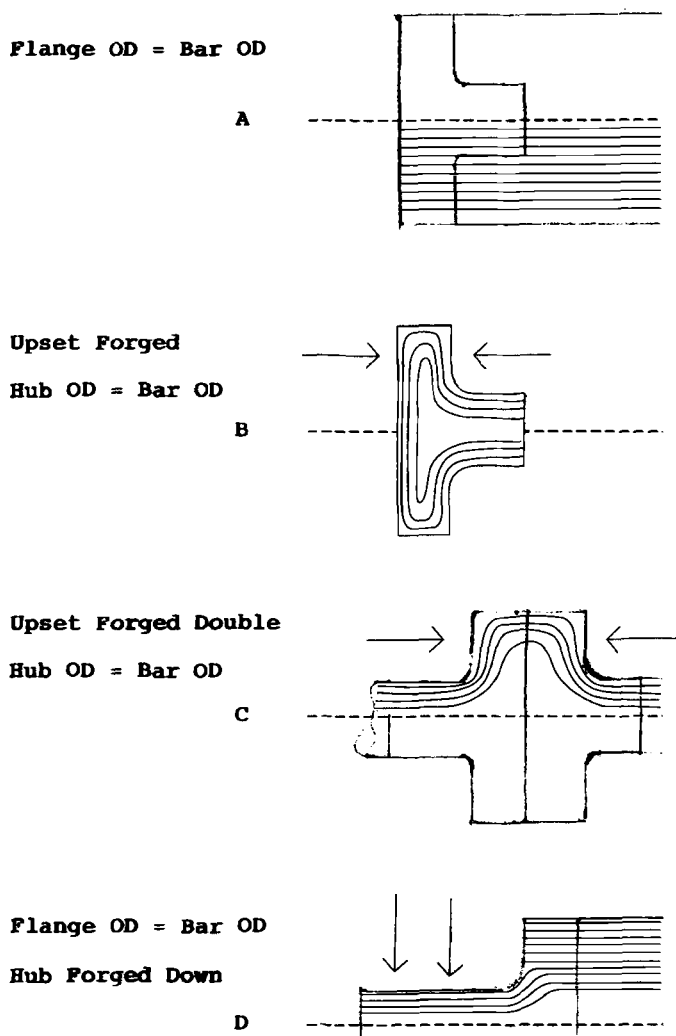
Sketches of methods to produce flanges to an ASTM steel fittings specification using forged or rolled bar stock as the starting material: Method A, direct machining from bar is not permitted by the fitting specifications; Method B, by upsetting the flange from a starting bar size close to the flange hub size; Method C, by upsetting a double flange forging from bar close to the hub diameter; Method D, by starting with a bar size equal to the flange OD and forging the hub down. This may not be permissible by the fitting specification rules.
